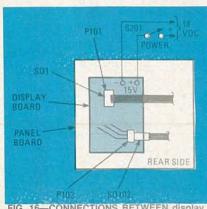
CONNECTIONS BETWEEN display board and panel board, and display board and power-supply jack.
